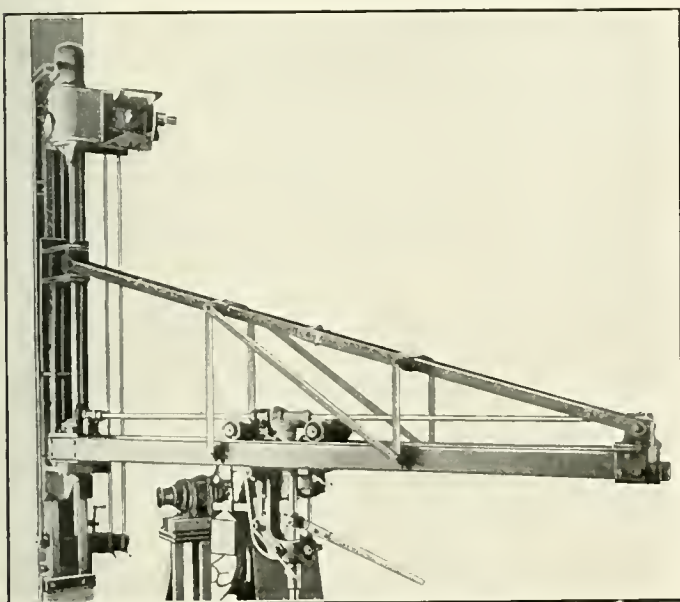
Lynd-Farquhar Wall Column Radial Drill.
